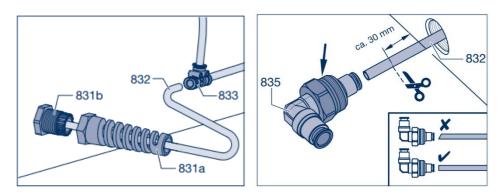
Old connection of piping kit to the axle (Left) vs the new connection of the piping kit to the axle (Right)
